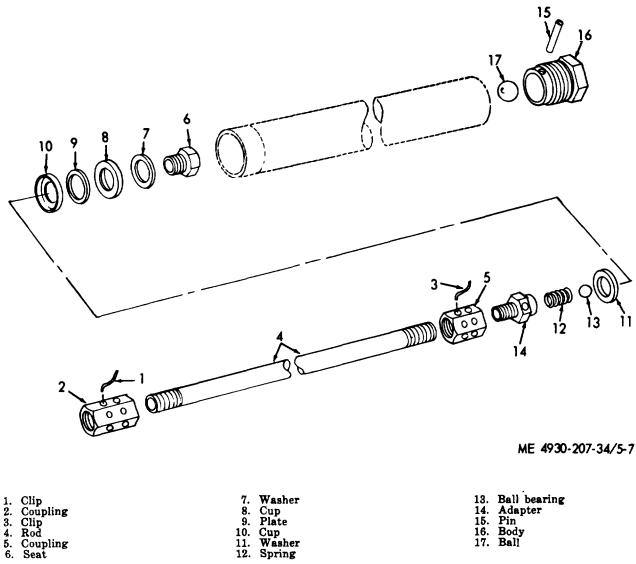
Low pressure tube, o	disassembly and reassembly.
